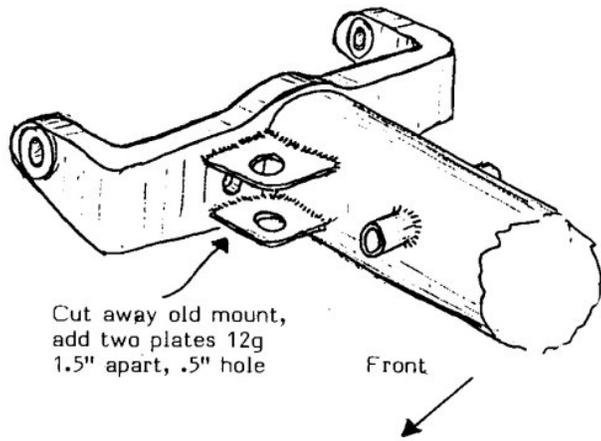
Fitting brackets for radius rod to Jag. IRS lower member.
